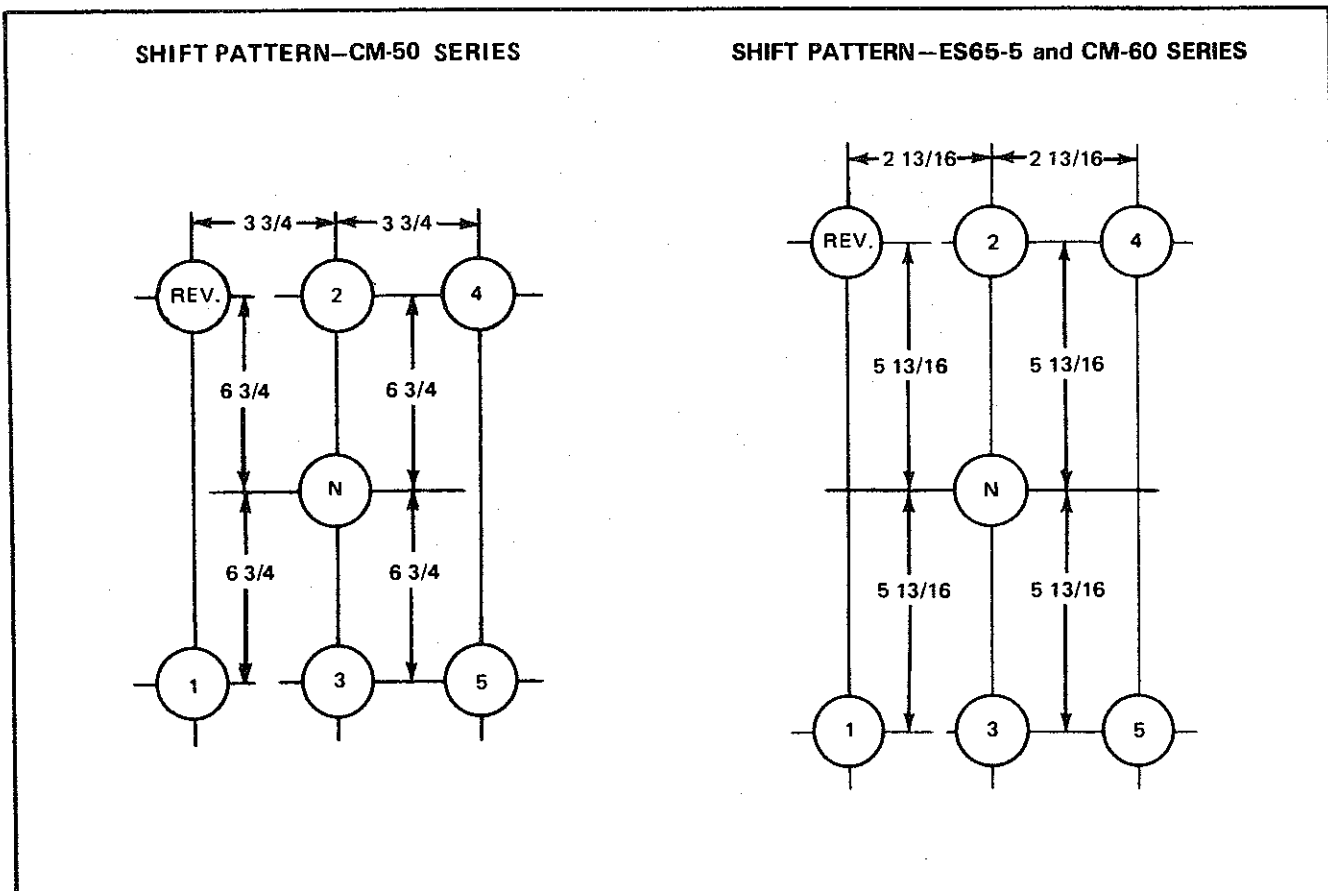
ES65-5, CM50 and CM60 Shift Patterns
